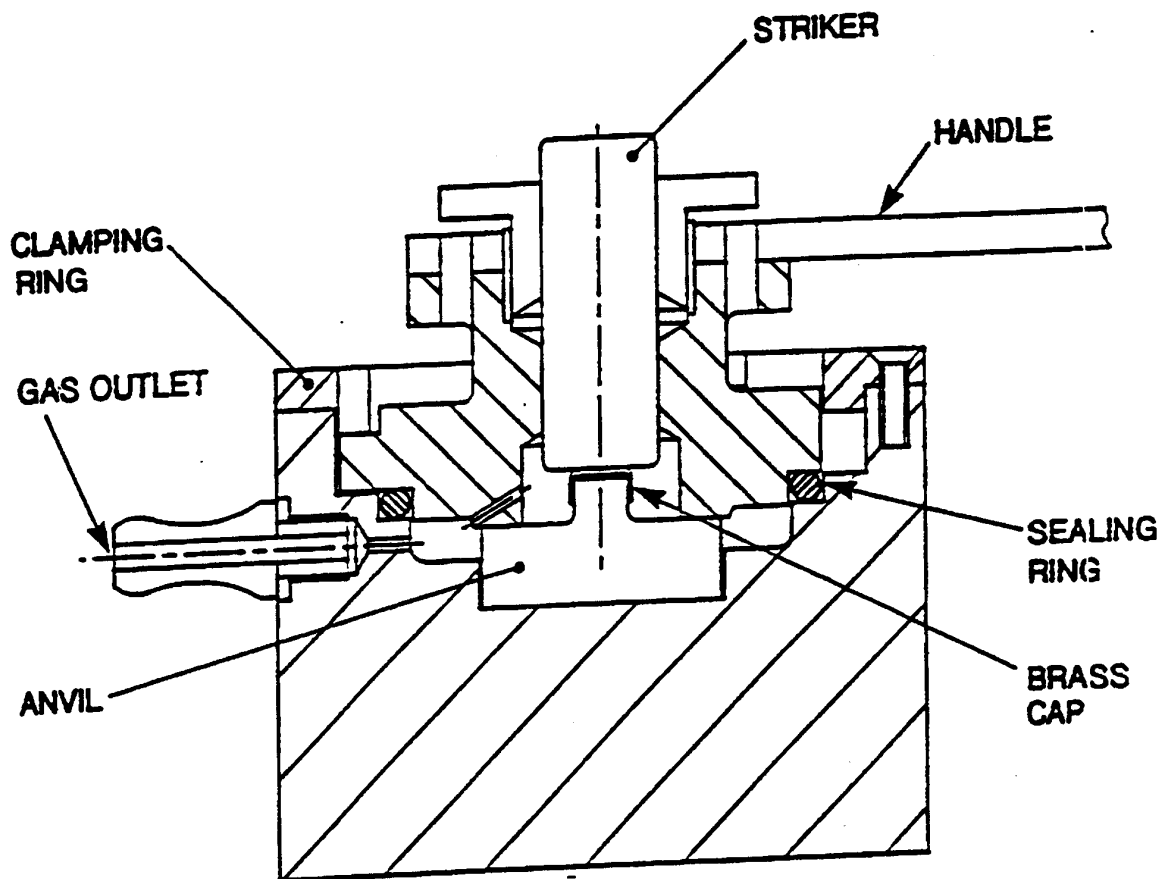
ANVIL HOUSING, ROTTER IMPACT MACHINE
